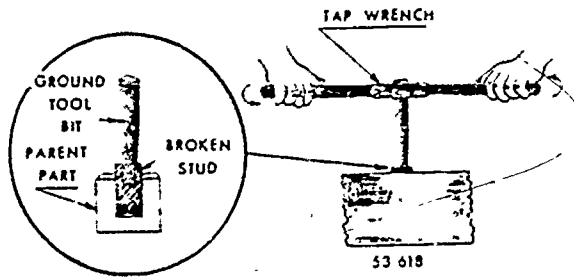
Stud Driver Made of High-Speed Tool Bit.
